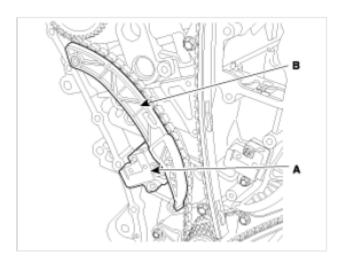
Identifying Timing Belt Courtesy of HYUNDAI MOTOR CO.
